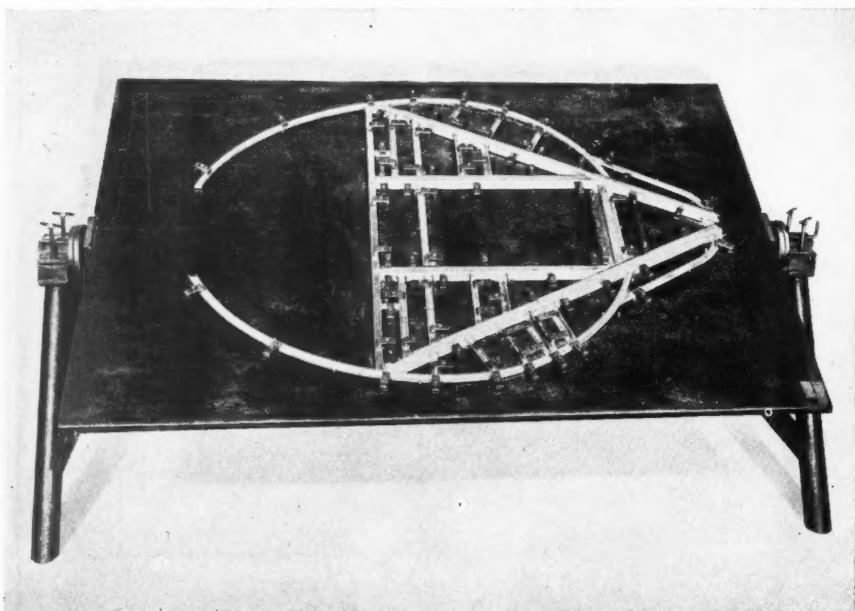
By scribing the desired contour of the assembly to be welded on the fixture base by the use of templates, the clips and stops can be located so as to hold the work in the required position for welding
